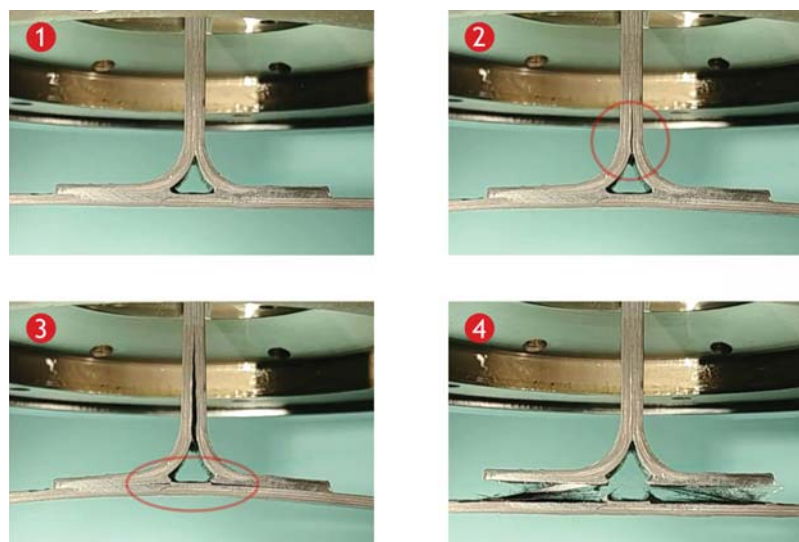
Type III failure sequence on specimen “Tool_empty”: 1) Starting point; 2) Crack initiation; 3) Crack propagation; 4) Detachment from the skin.
